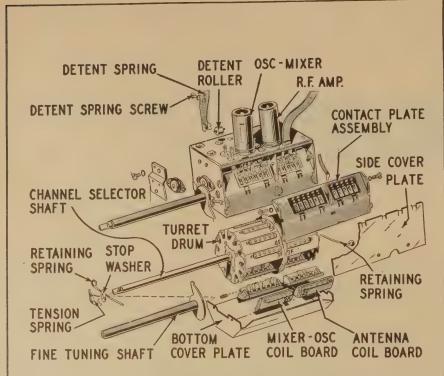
Exploded view of Standard Coil turret-type tuner, showing check points. As in all switching devices, points most susceptible to wear are coil-segment contacts, fixed-contact tension, and detent mechanism. Bearings detent roller, and fine-tuning control may also require periodical cleaning and lubrication. Circuit overhaul hints are given in the text.
